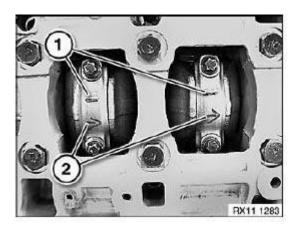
Identifying Timing Chain Drive Direction And Bearing Cap Courtesy of BMW OF NORTH AMERICA, INC.
